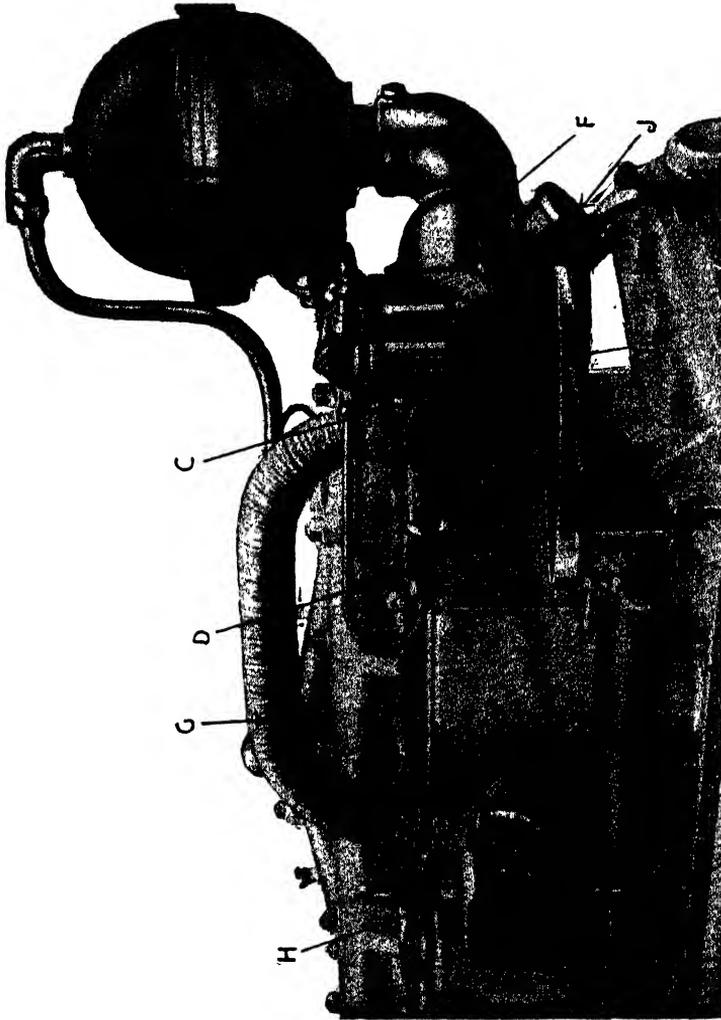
The Thornycroft Paraffin Carburettor and Vaporizer
